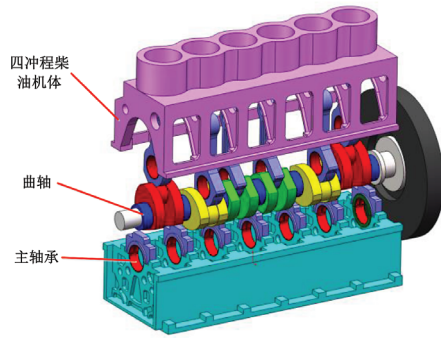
Three – dimensional model of marine four – stroke diesel engine
